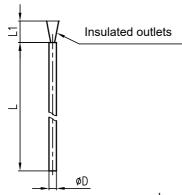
DIMENSIONAL DRAWING - DESIGN A
